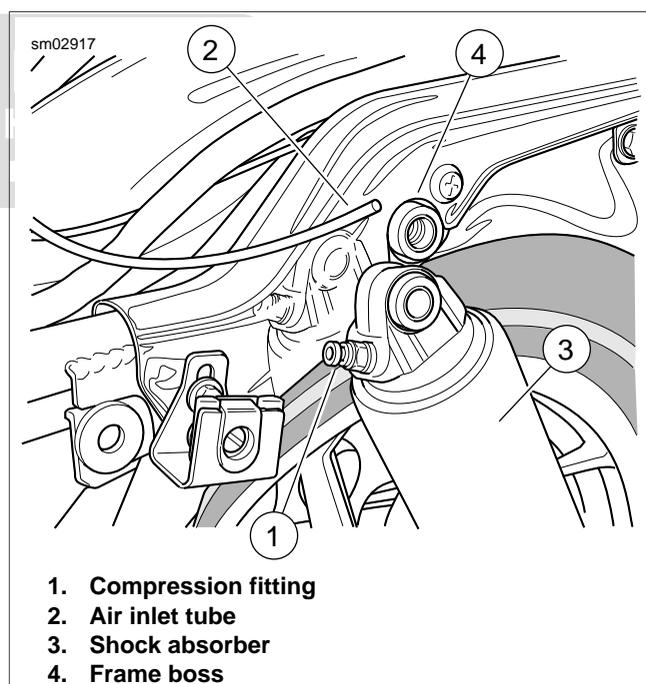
Remove Upper Shock Mounting Bolt (Left Side View)
